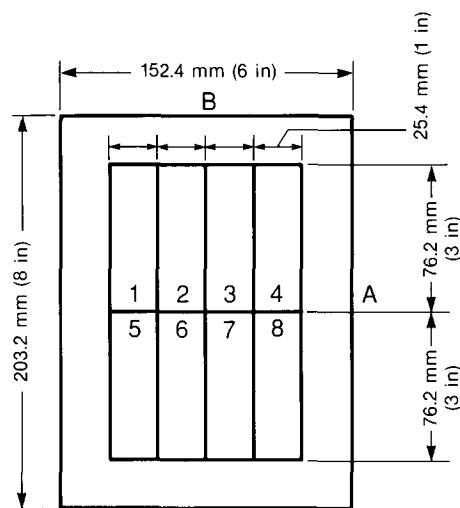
Layout showing locations of eight numbered specimens cut from 152 mm × 203 mm injection-moulded plaques
